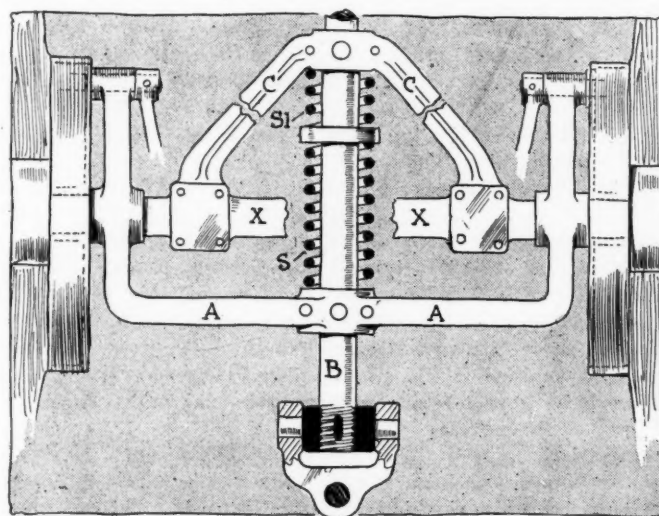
Diagram of device for tractor-trailer use, showing the principle of taking care of drawbar pull of the trailer. Parts are: Axle *X*; drawbar *B*; buffer spring *S*; reactive spring *Si*; backarm *A*; inner support *C
